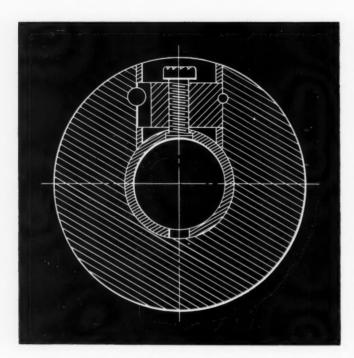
Cross-sectional View through a Tailstock Assembly, Showing Manner in which Radially Adjustable Counterweights are Attached
